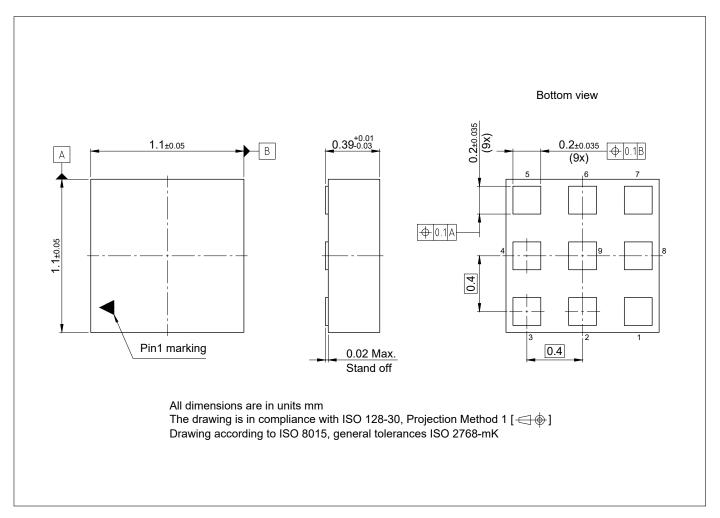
TSLP-9-8 Package outline (top, side and bottom views)
